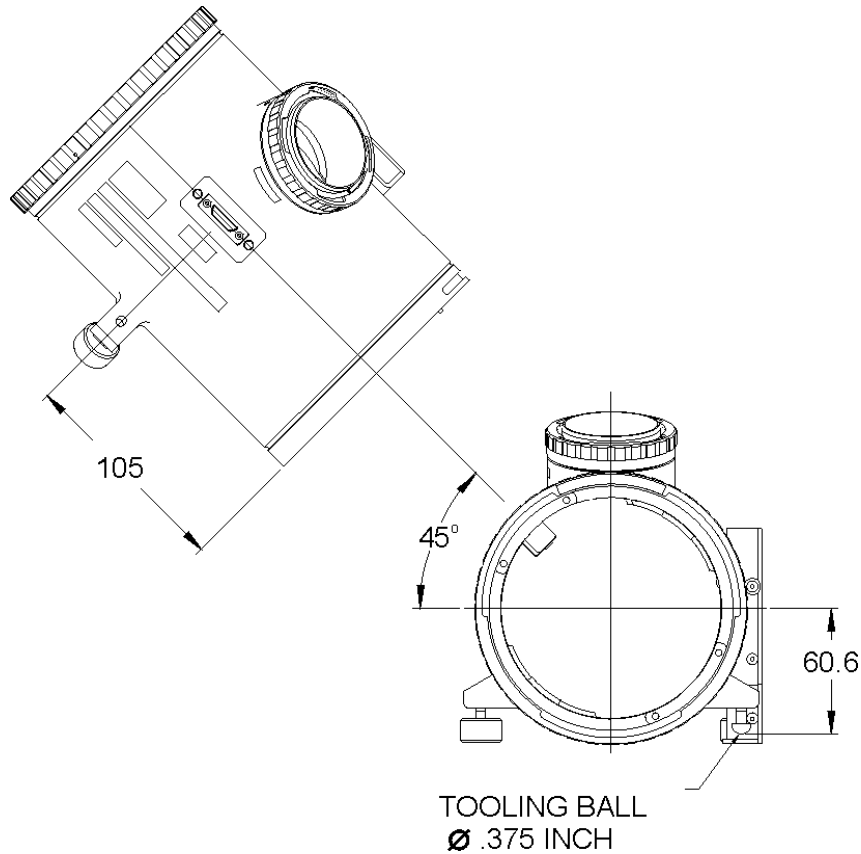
CIR OPTICS HOUSING MODULE ELECTRICAL CONNECTOR LOCATION
